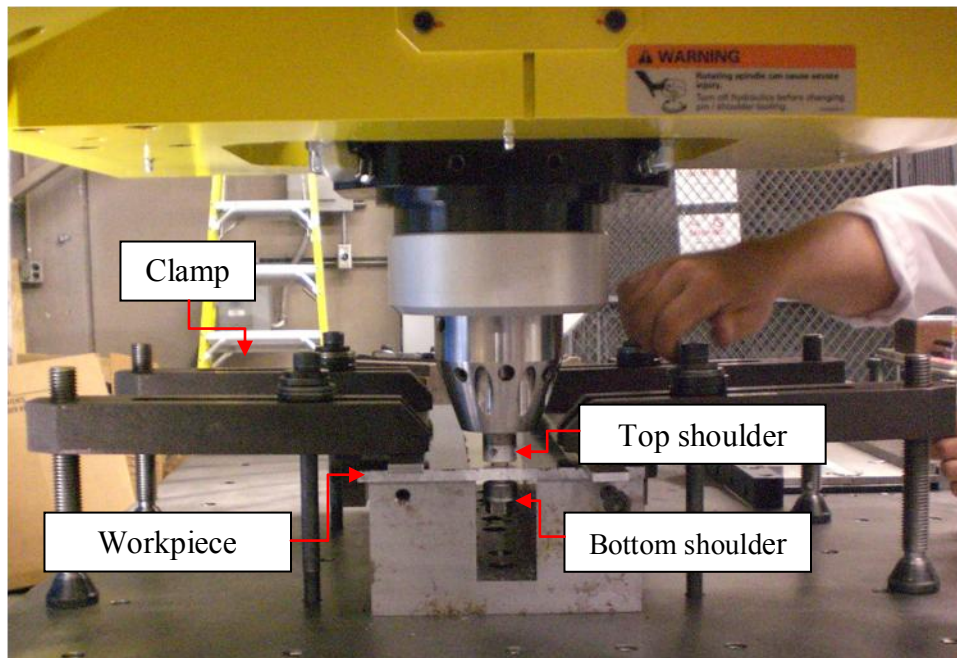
Self-reacting friction stir weld clamping system.
